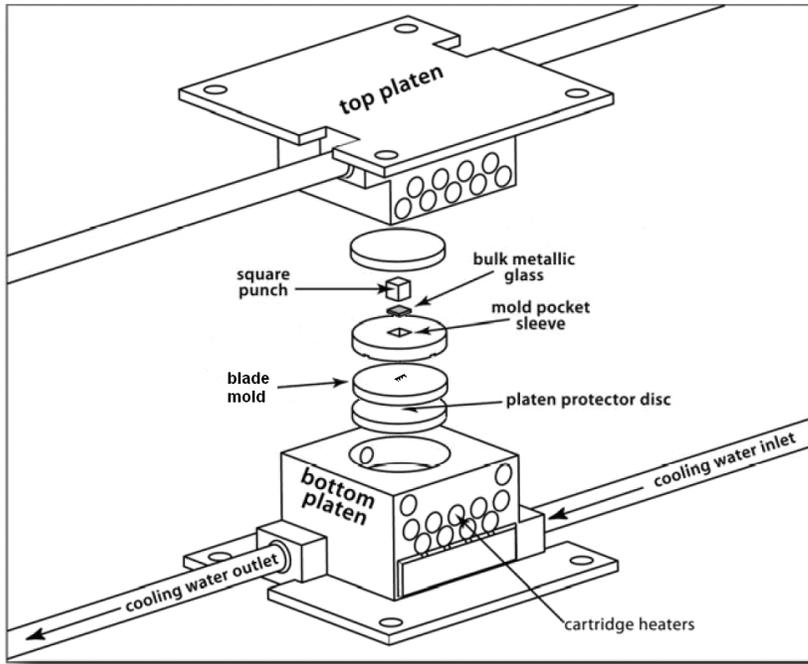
Schematic of the parts used with the load frame for molding [7]
